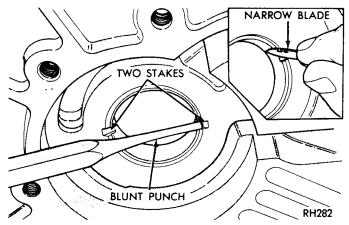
Stake Pump Bushing (A-904T and A-999)
